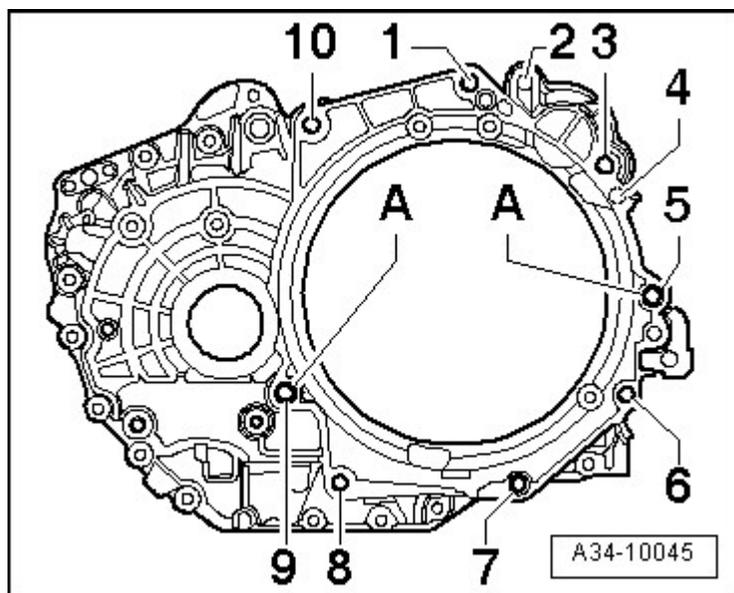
Identifying Direct Shift Automatic Transmission To Engine Mounting Bolts
